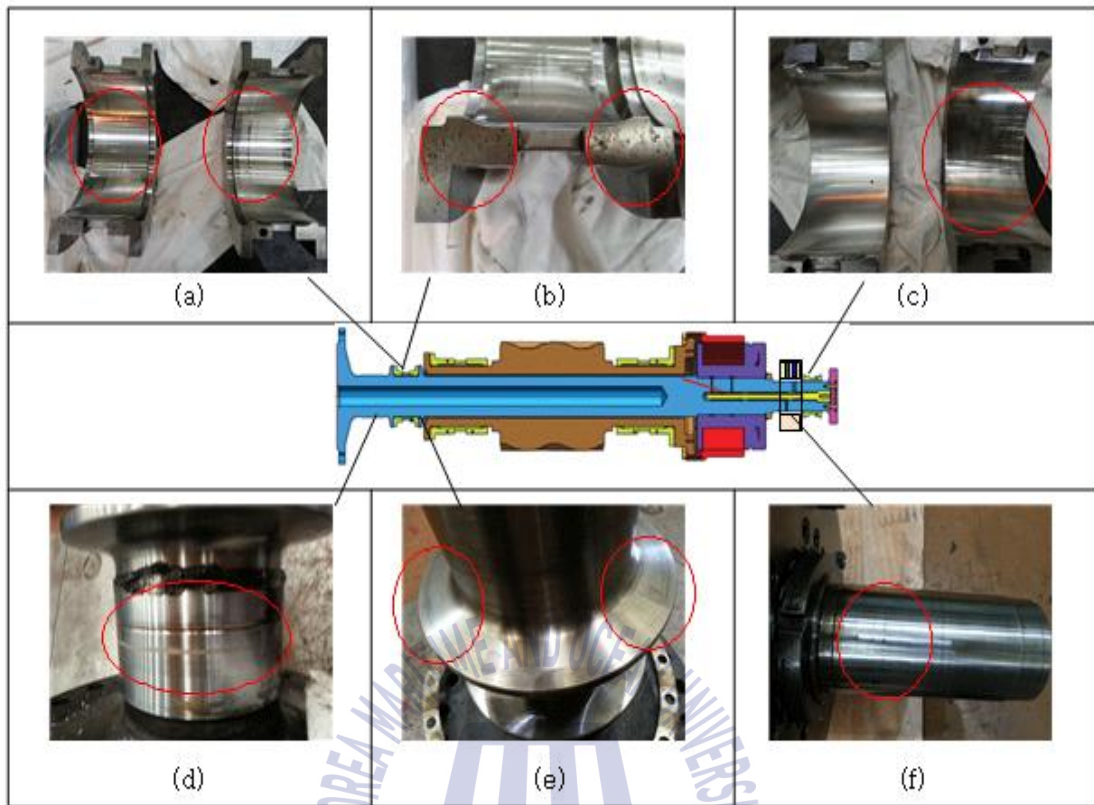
Damage of stuck clutch shaft and bearings¹⁾
